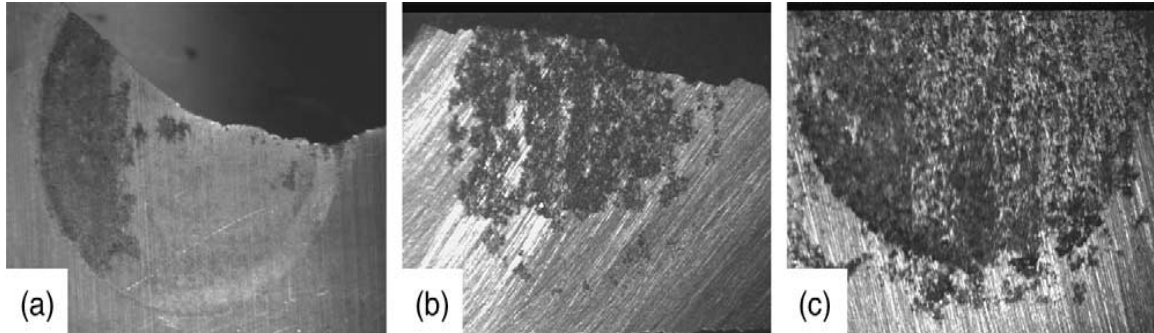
Examples of corrosion damage in fatigue coupons, (a) mild, (b) medium, (c) severe [14].
